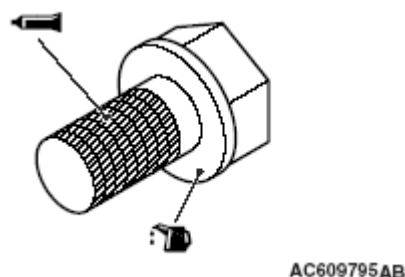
Applying Engine Oil To Installation Face Of Flywheel Bolts
